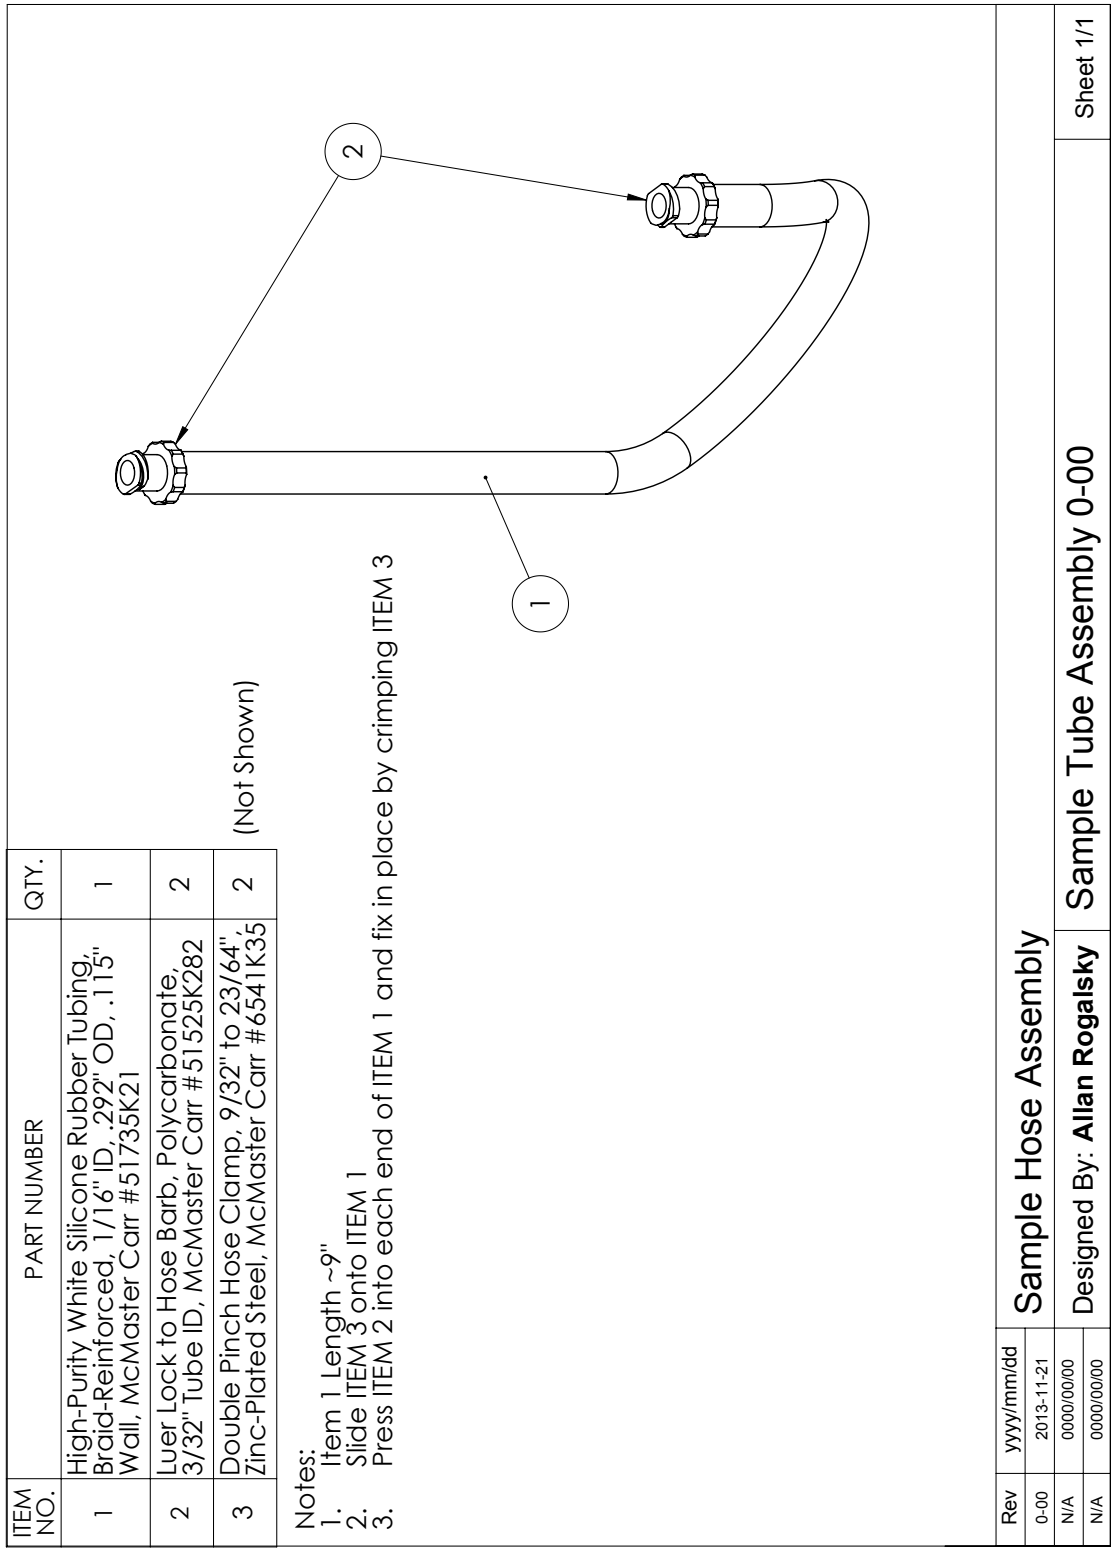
Capillary Rheometer / Sample Hose Assembly
